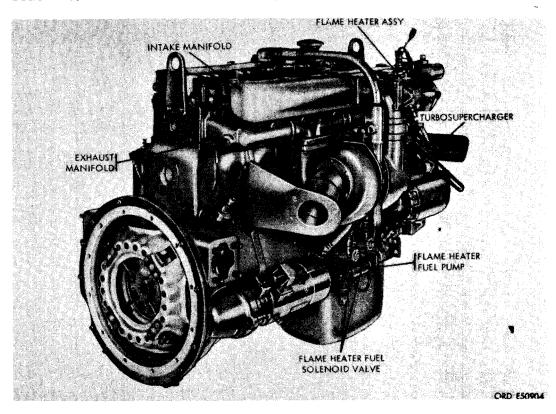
EARLY MODEL LDS -427-2 ENGINE ASSEMBLY - 3/4 RIGHT REAR VIEW.
